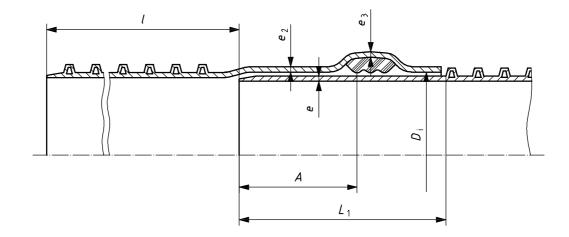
Typical example of an elastomeric sealing ring joint with sealing ring located in the socket, Type B
